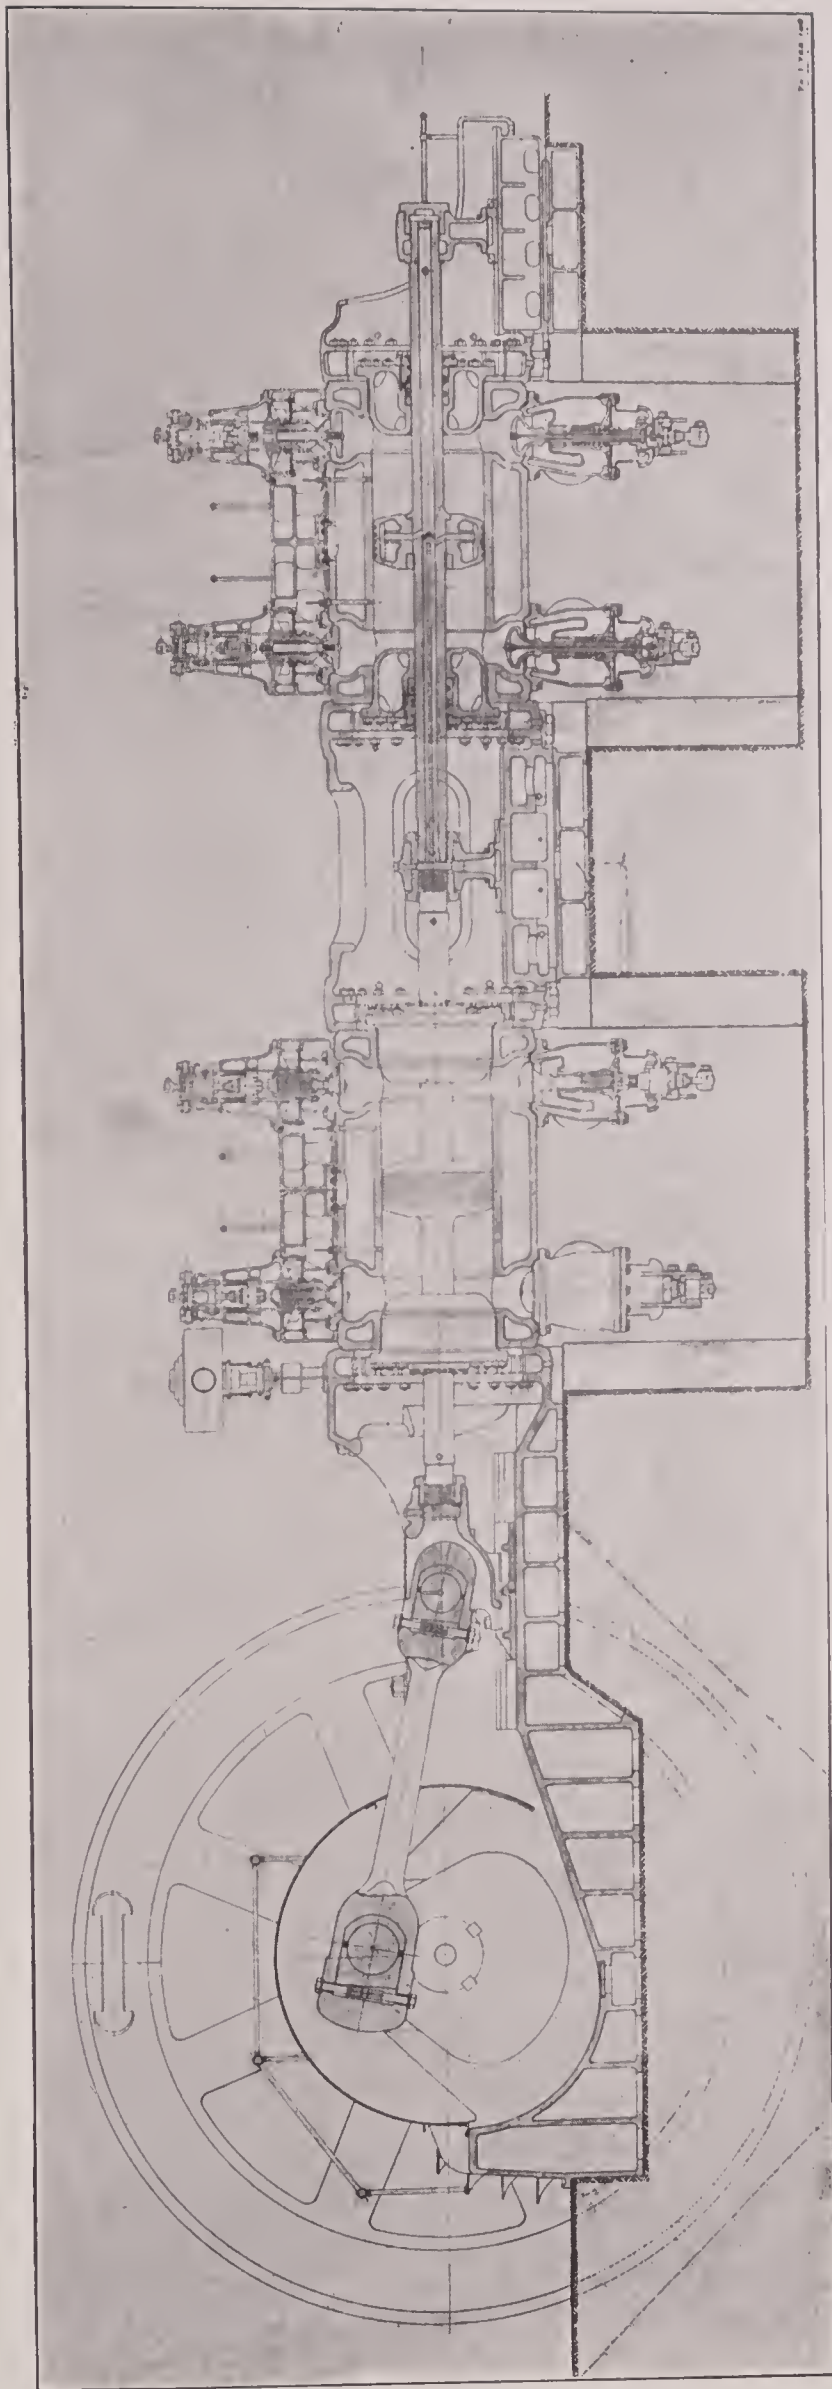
Longitudinal Cross-section, Allis-Chalmers Engine.
